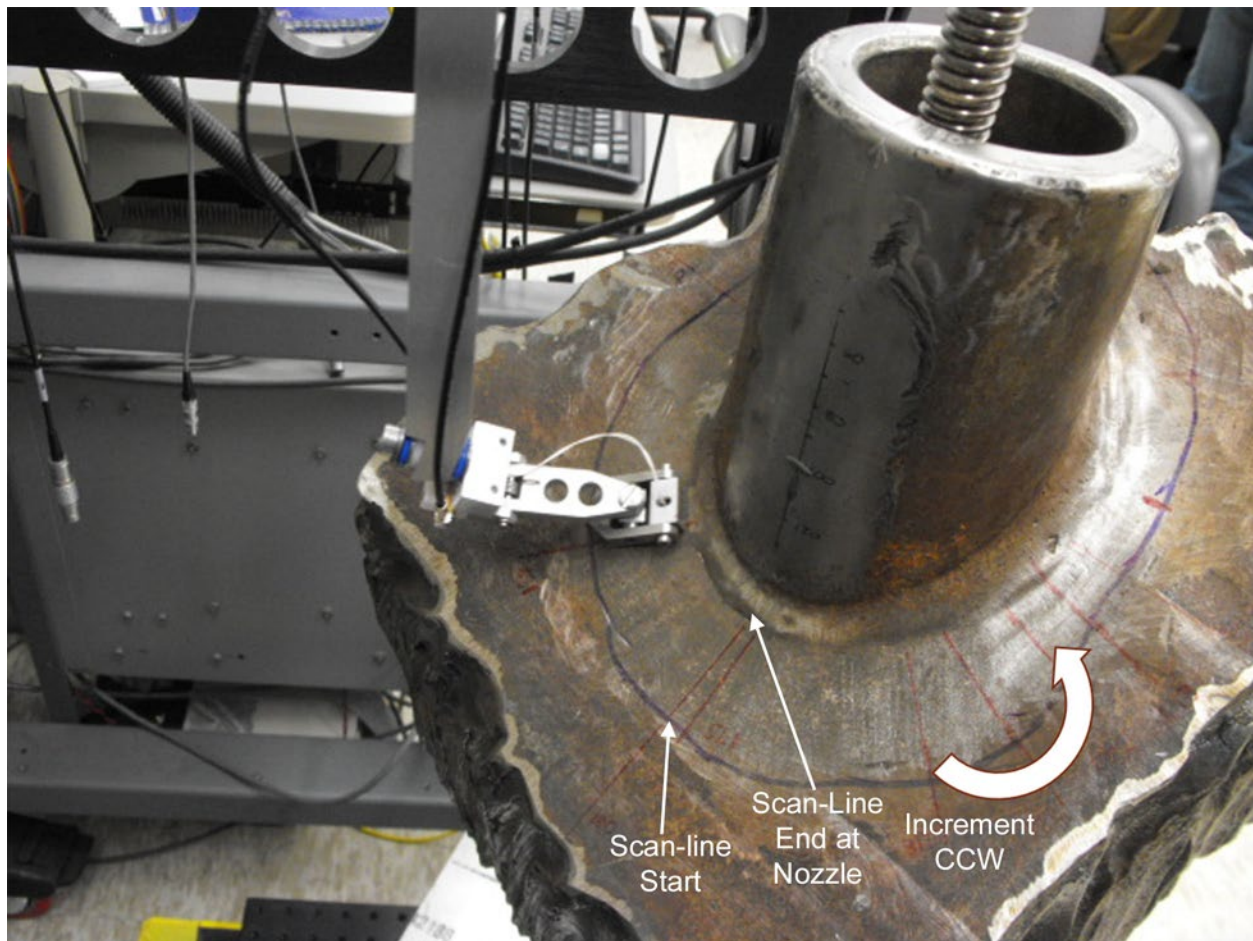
CRDM Sample #6 Examination of J-groove Fillet Weld and Portions of RPV Head
